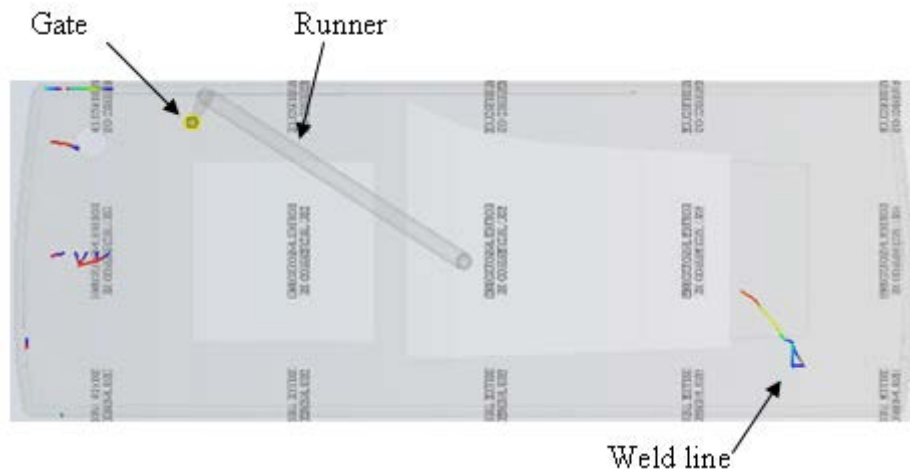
Weld lines produced by runner diameter of 3.042mm
